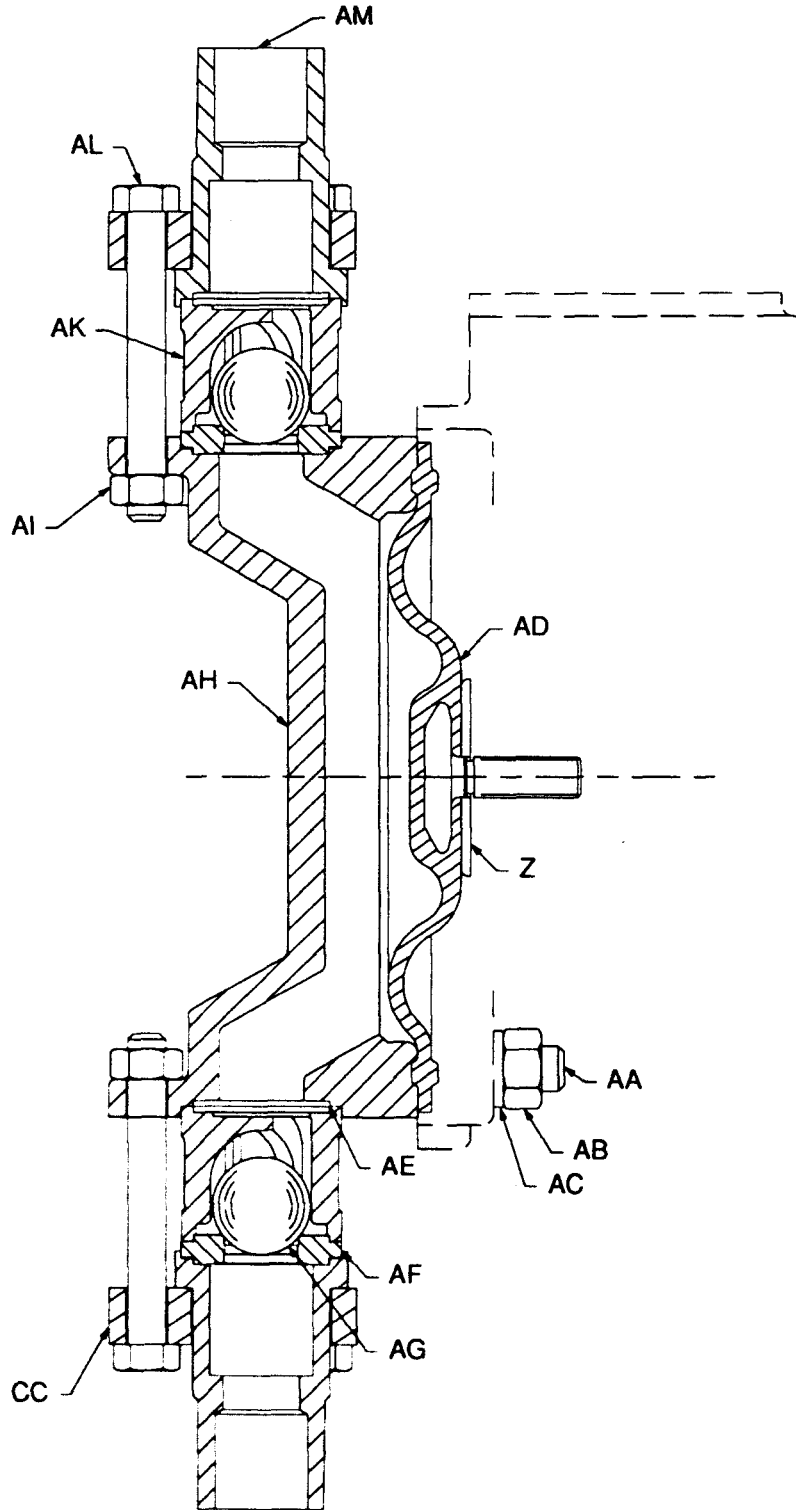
maxRoy Metallic Liquid End Parts Reference Drawing.
